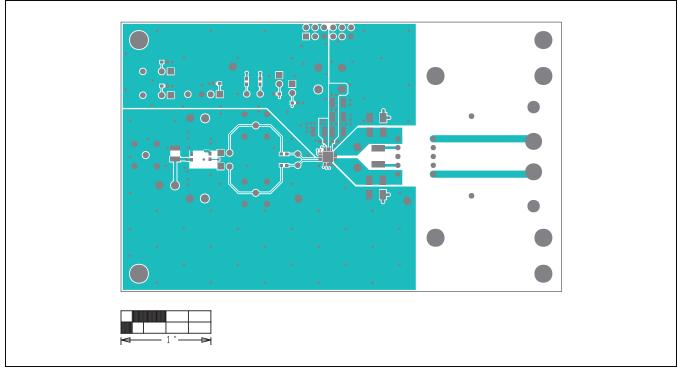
MAX44211 EV Kit PCB Layout—Component Side
